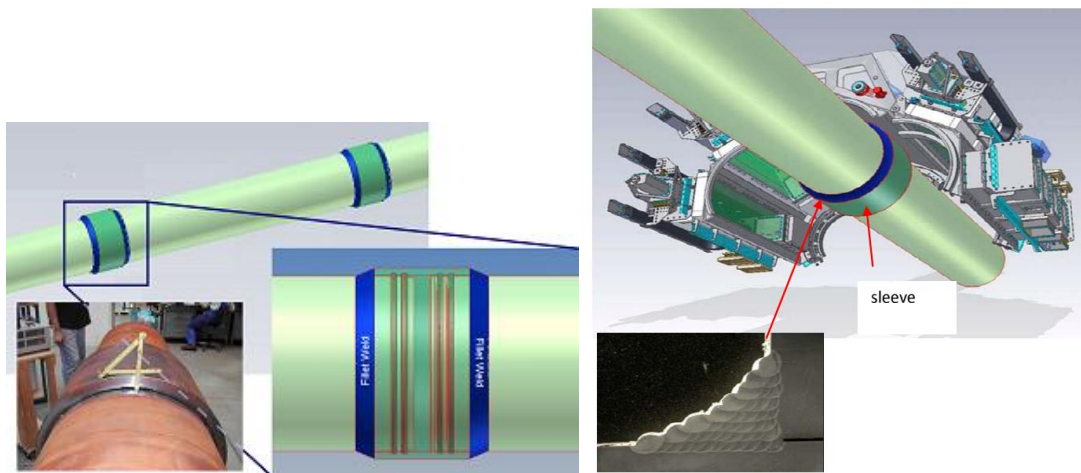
(left) Sleeve concept for pipeline connections and repairs. Inset photograph shows a laboratory mock-up of a sleeve joint, (right) sketch of the welded concept ^{43; 156}
